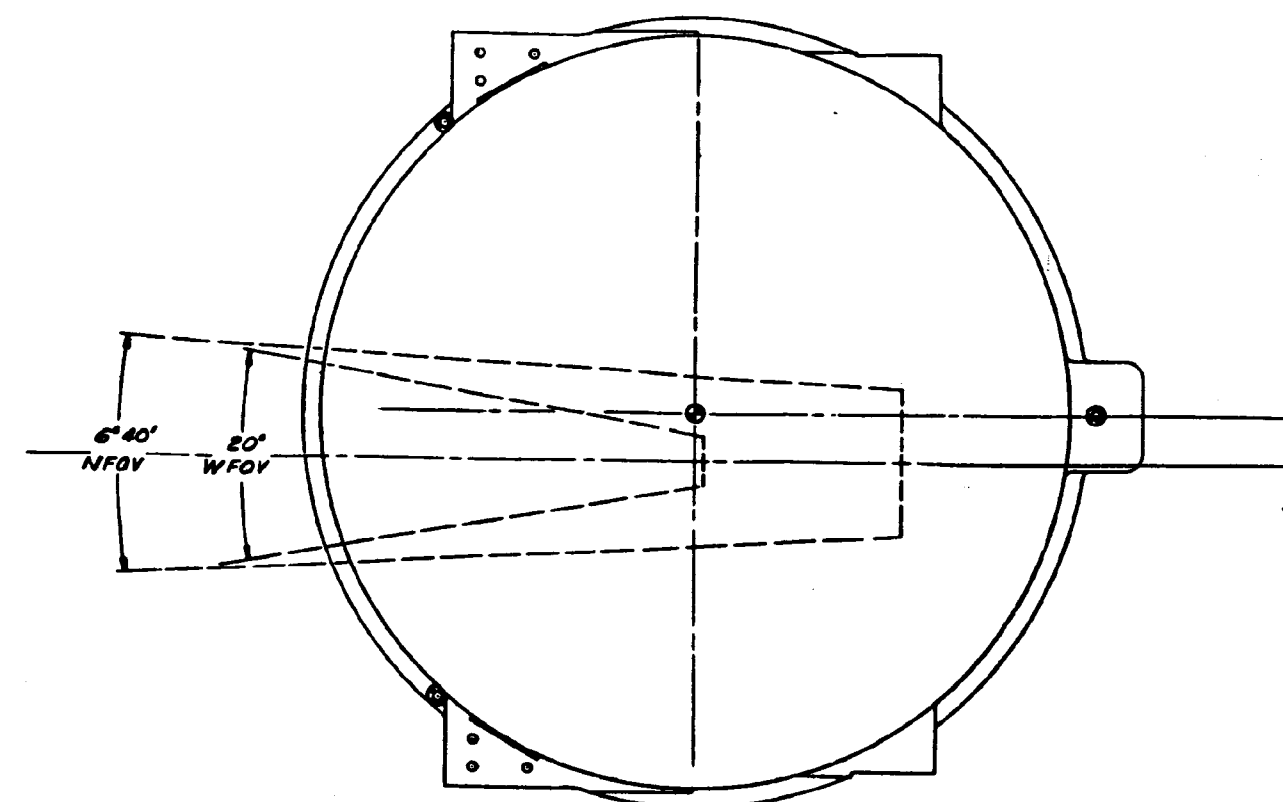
Receiver converter, outline drawing. (sheet 2 of 5)
